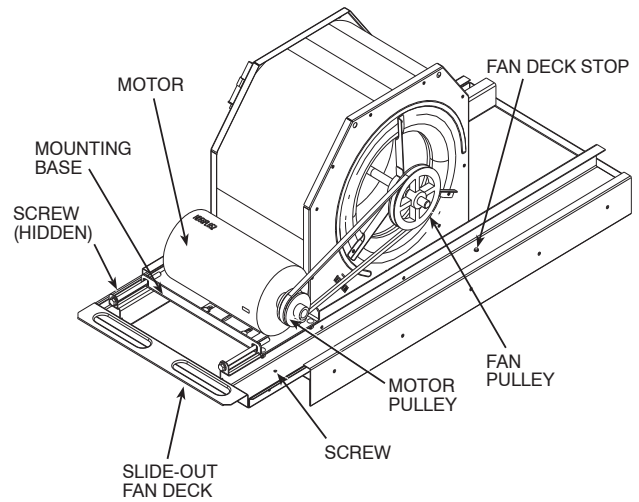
Evaporator-Fan Motor Adjustment (Sizes 08-14 Shown)
